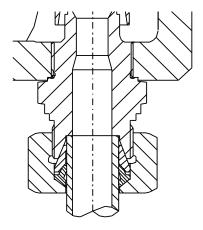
Swagelok compression fitting with double locking ring
